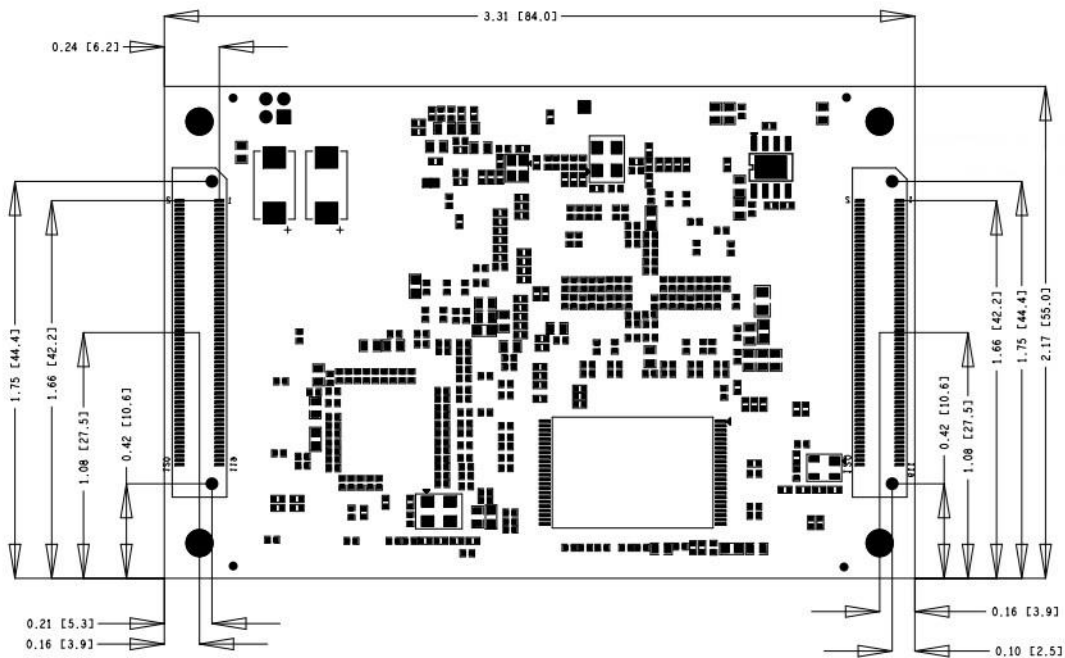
Mechanical Drawing of Main Board (Bottom View)
